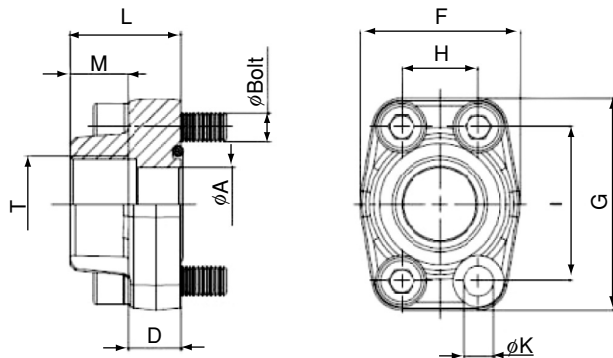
Engineering drawing of SAE flange 3'' nominal bore.
